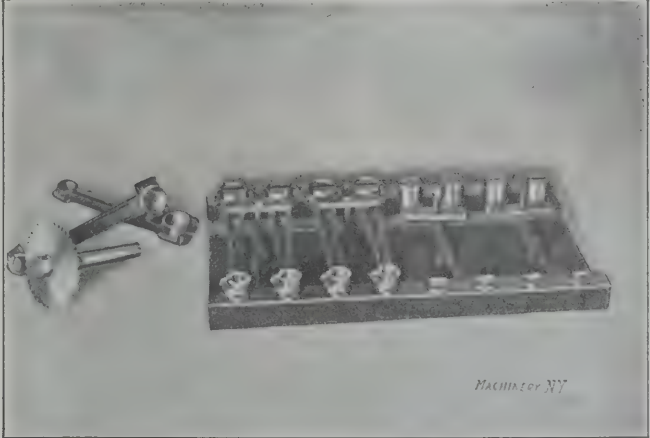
Fixture in which Connecting-rod Bearings are cut off
